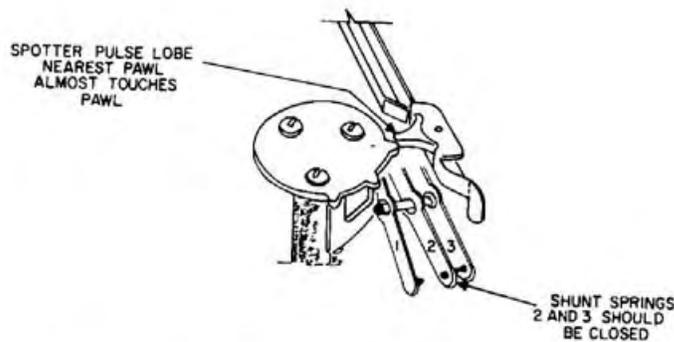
Adjustment of Spotter Lobe with Relation to Shunt Springs.
